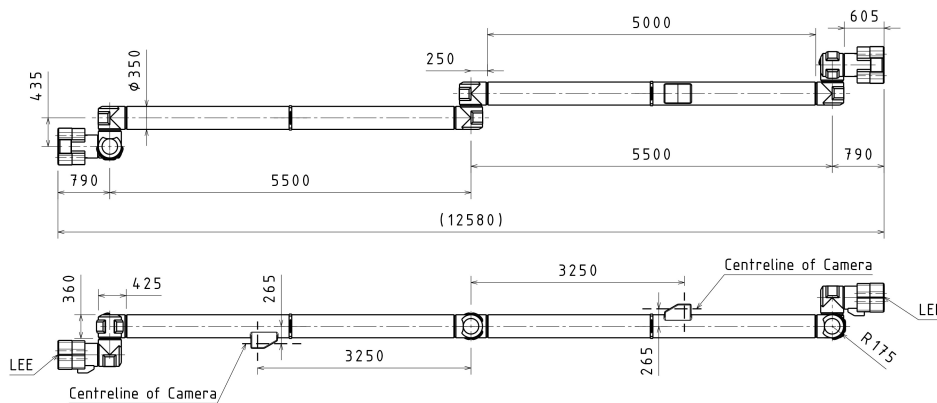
Technical drawing of the RMS including dimensions in mm.
